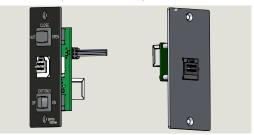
Program switch panel and RJ 45 plate assembly
